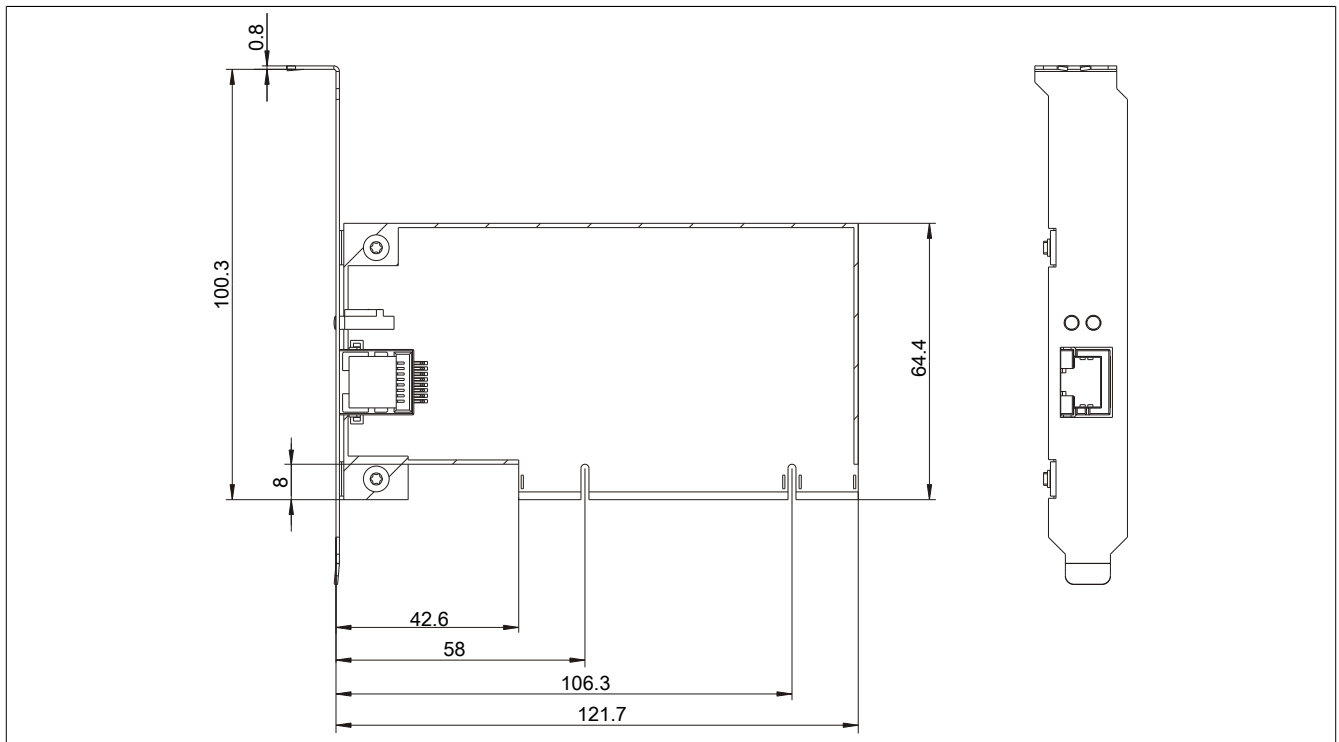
5ACPCI.ETH1-01 - Dimensions
